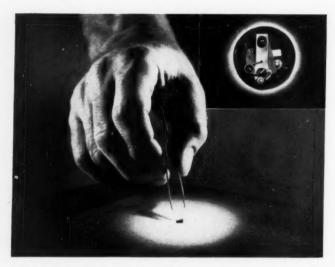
Tiny bushing of molded plastic serves as bearing mounting in automotive distributor
